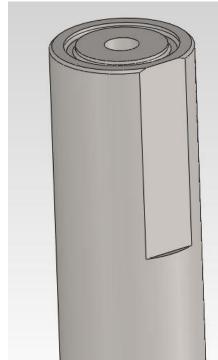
The picture shows the Weldon interface for the spindle axis and also the O-ring interface
